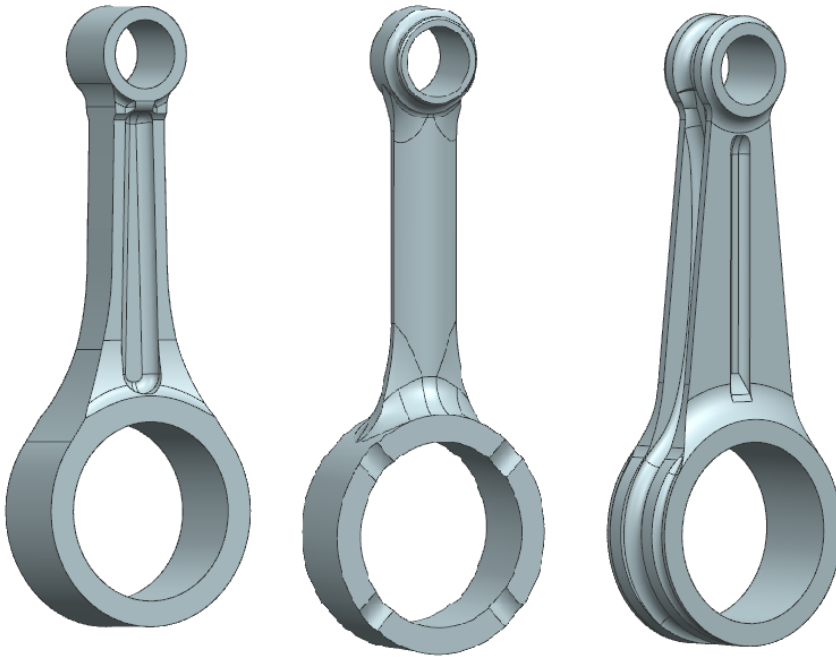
Oem steel rod, Steel Knife rod, Titanium H rod
